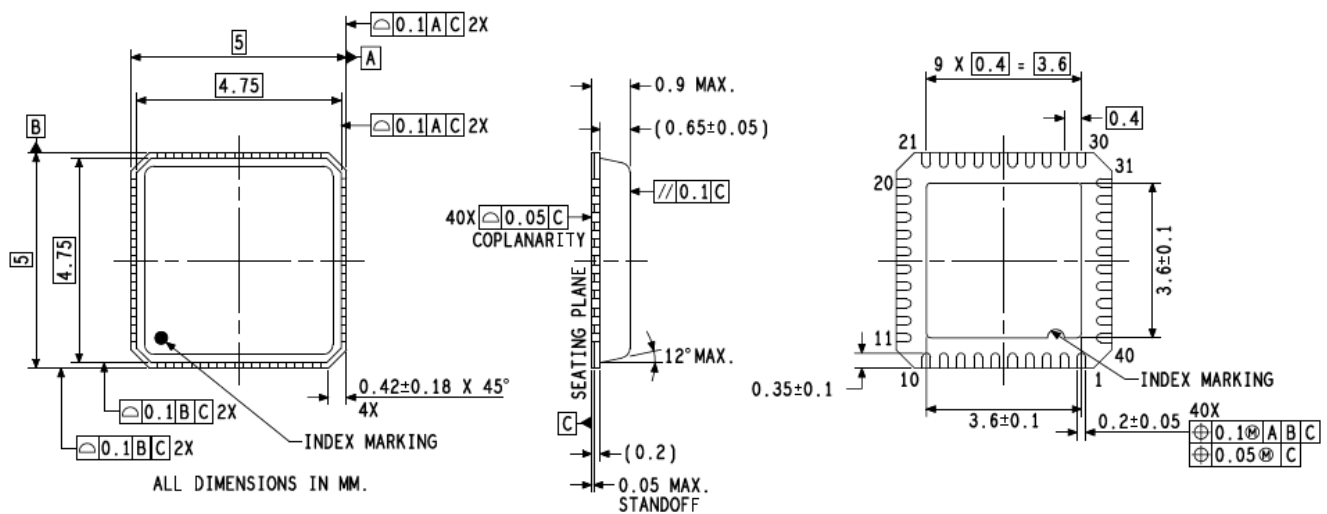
40-lead punched QFN, 5mm x 5mm Package Dimensions
